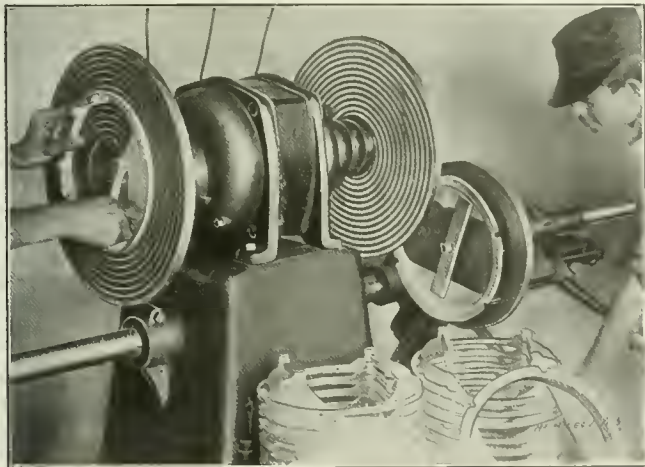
Grinding 12-inch Aluminum Alloy Rings. Rate, 40 Castings or 80 Sides per Hour
